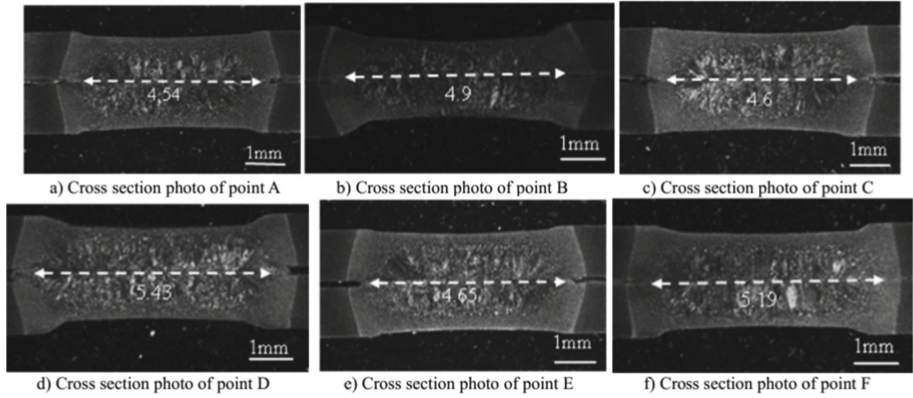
Cross-sectional photos of solder joints at different points of CR1300/2000HS steel specimens.
